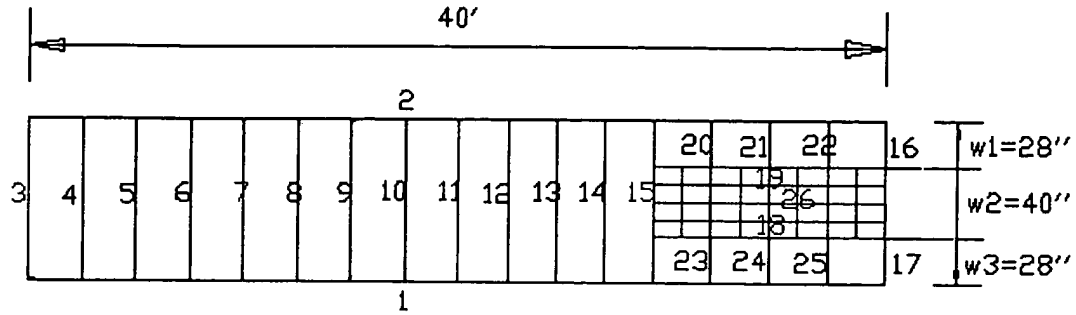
A/B: The floor frame panel structure model (40 foot and 40 foot high cube collapsible container)
